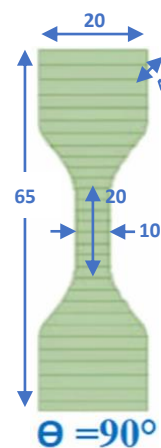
Tensile Testing Dogbone-shape Sample. Including dimensions in millimeters.
